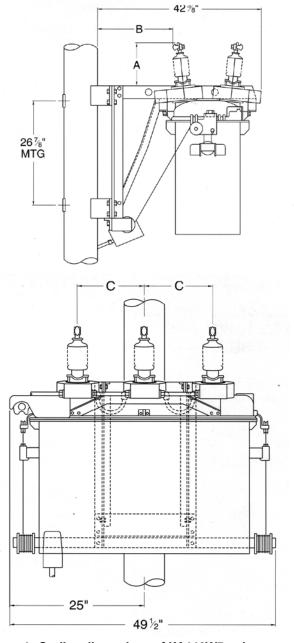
Outline dimensions of KA146W5 polemounting hanger and KA146W2 tank-lifting windlass.
